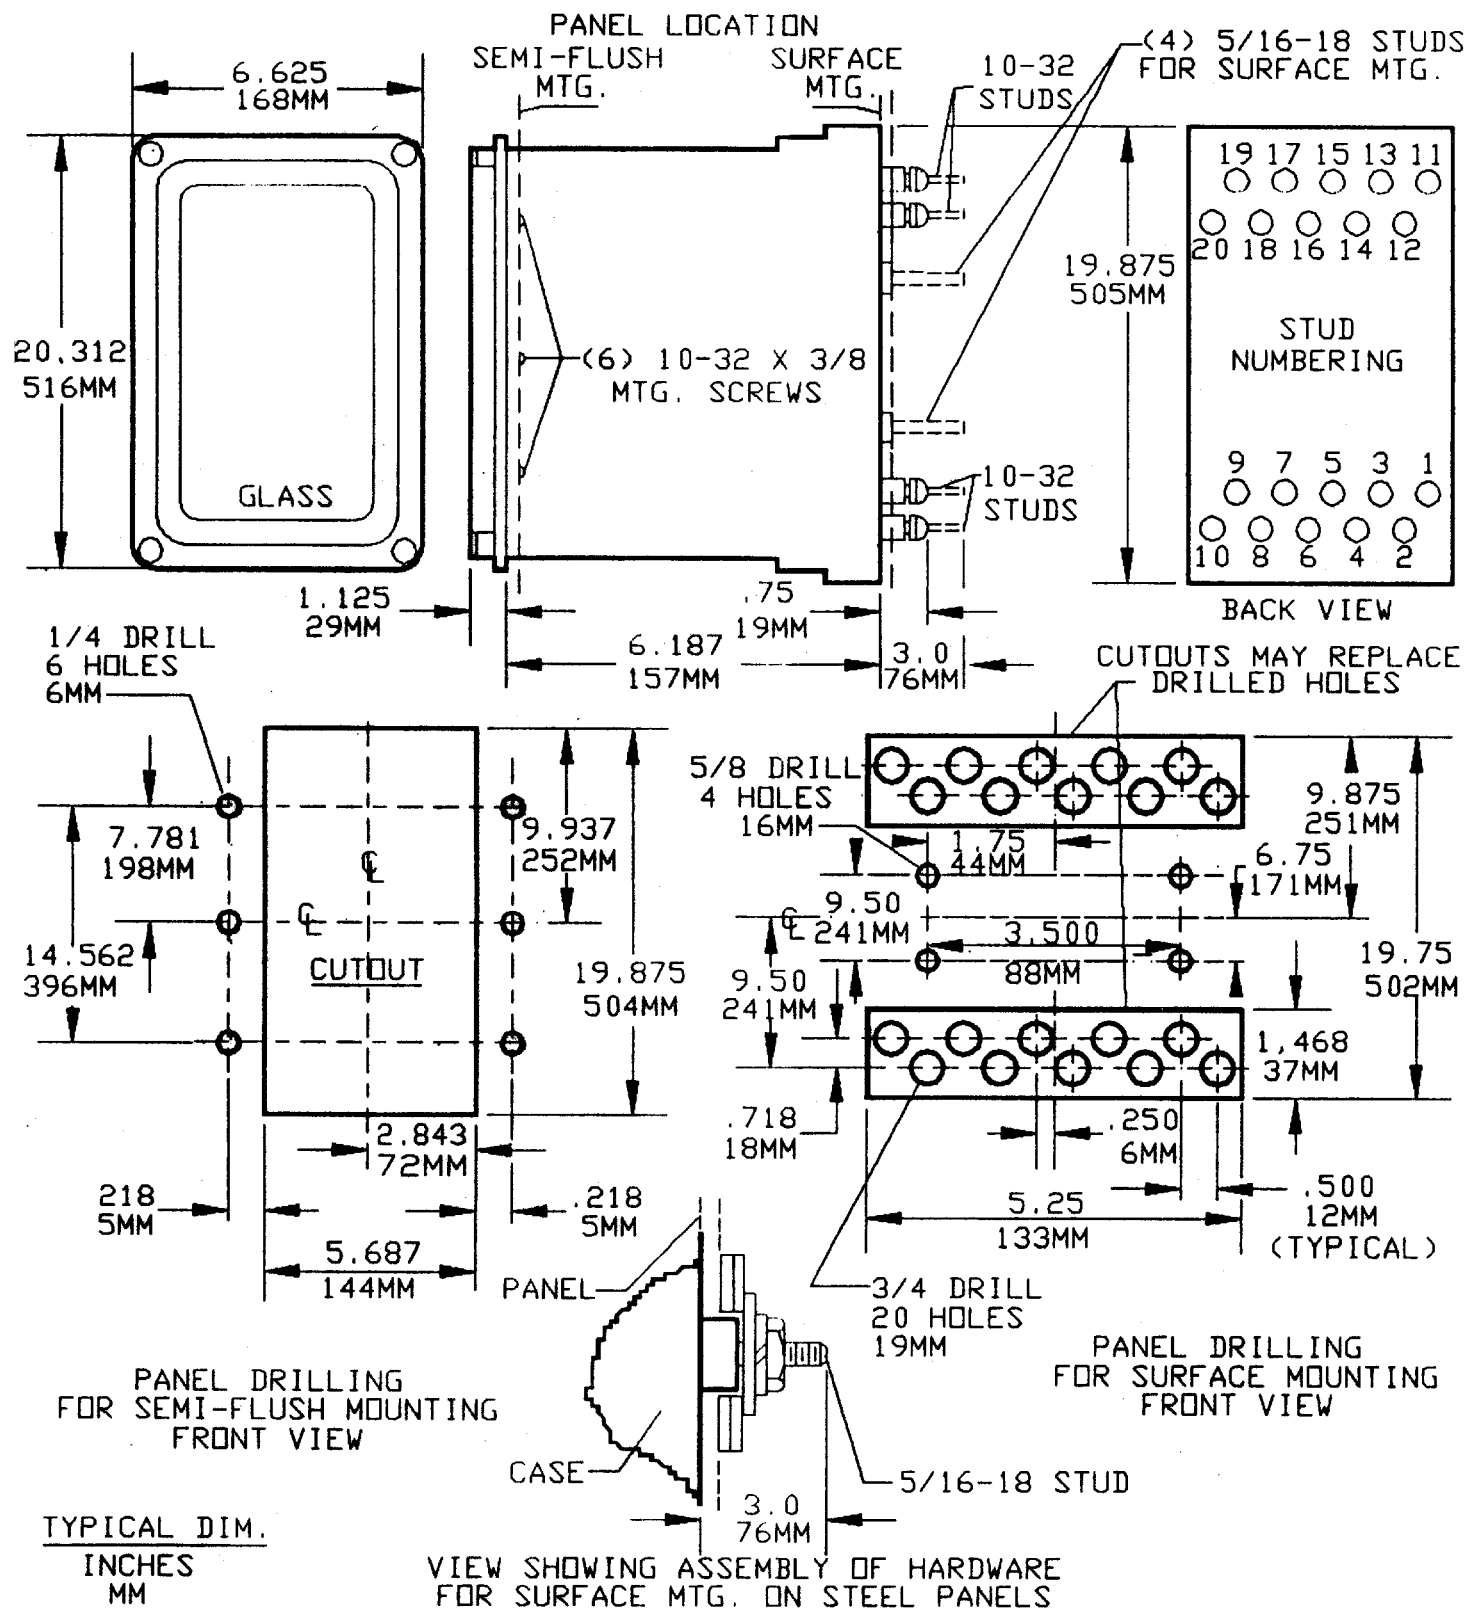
(6209276-3) Outline and Panel Drilling Dimensions for the CNP11A Relay
